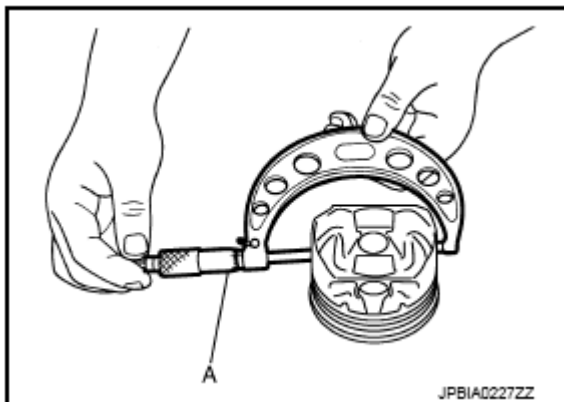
Measuring Outer Diameter Of Piston Skirt Using Micrometer
